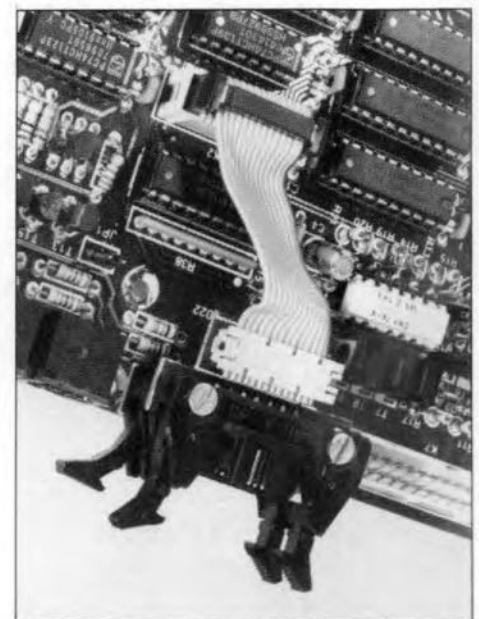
Seen here are connectors K1 and K20 fitted neatly on to the main board.
